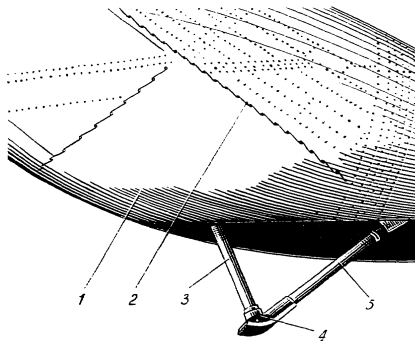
TAIL BUMPER AND TAIL BOOM LOWER FAIRING
